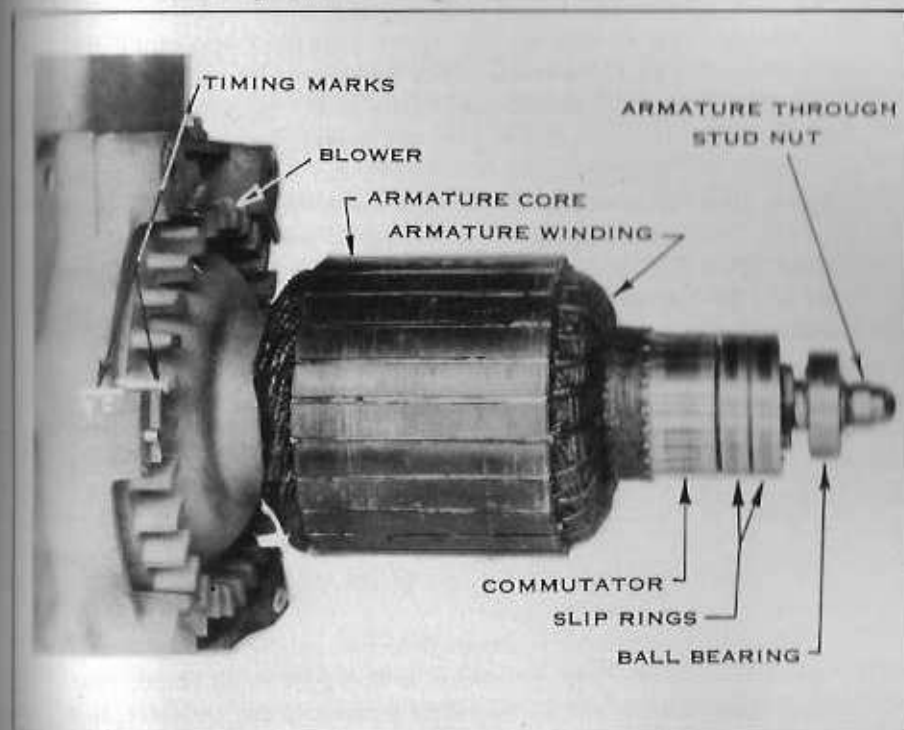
GENERATOR ARMATURE ASSEMBLED TO ENGINE
